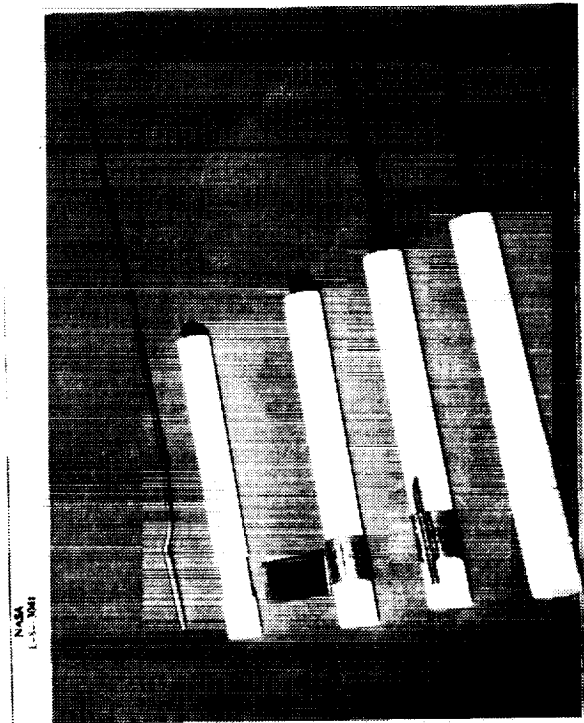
Assembly of the tool used for joining of tubes to fittings.
